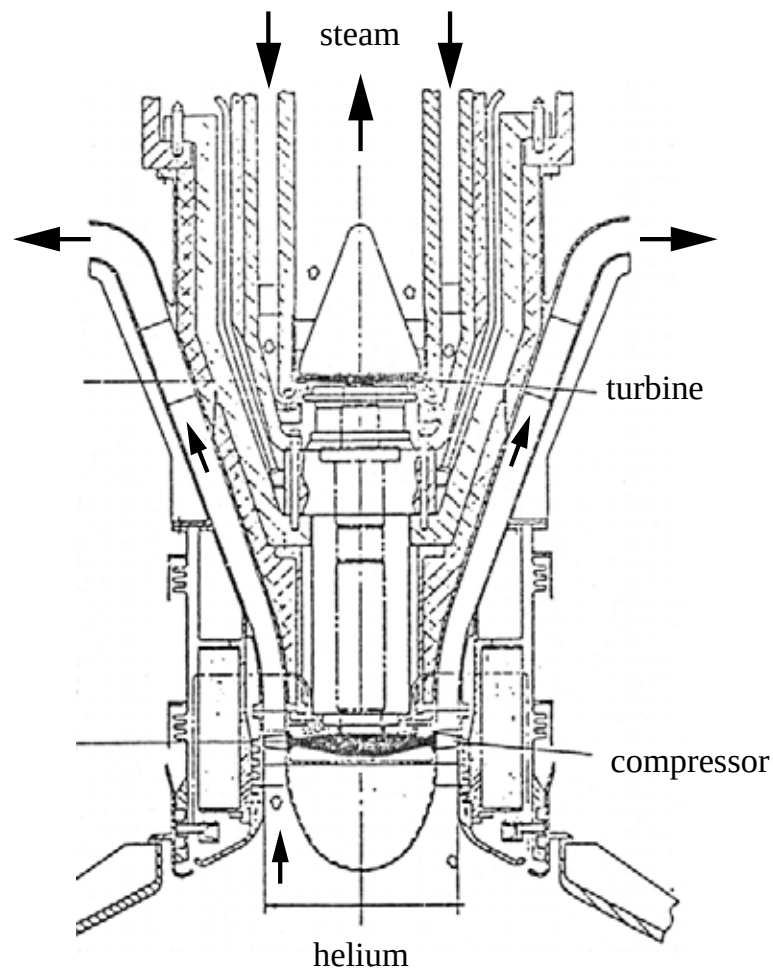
Concept of the HTR 1160 helium circulator unit driven by a steam turbine
